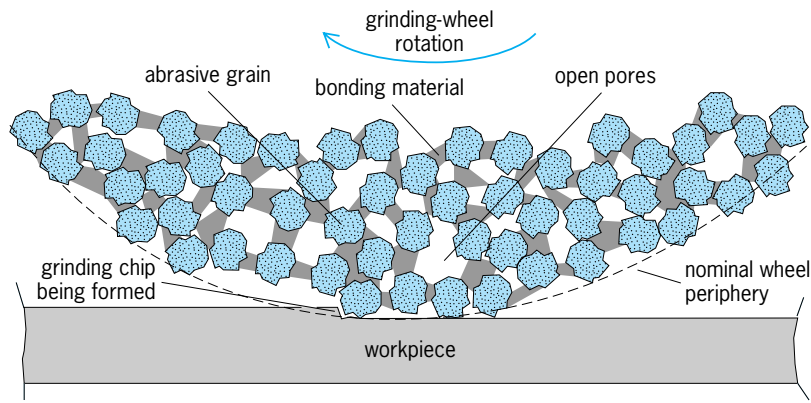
Action of a grinding wheel, showing how individual grains of the wheel produce chips from a workpiece.
